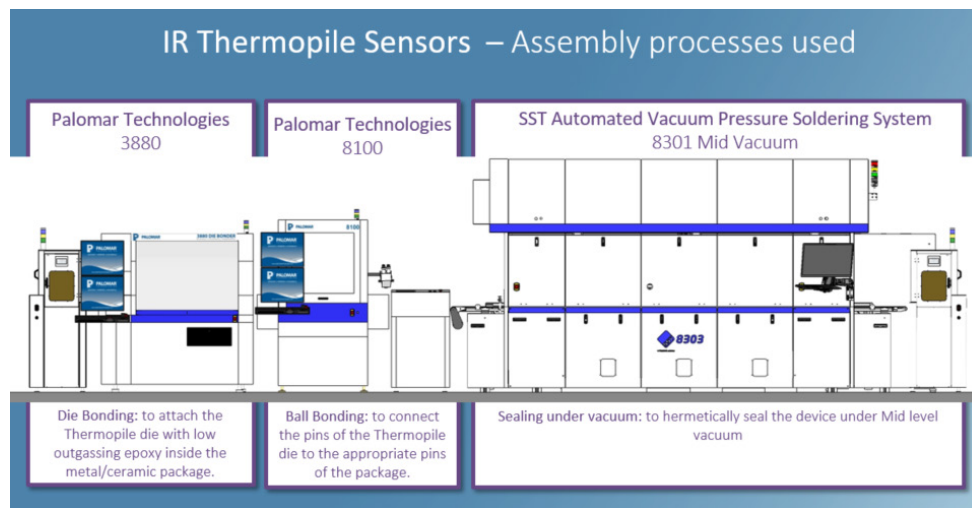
There are three main assembly processes utilized for the assembly the IR microbolometer: die bonding, wire bonding and vacuum sealing.
